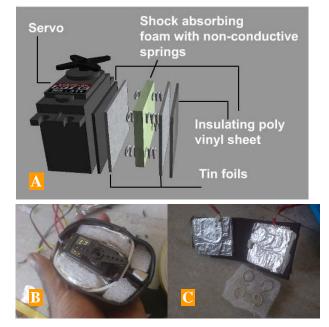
A)Exploded view of the capacitance skin sensor B)Constructed Snake module C)Tin foils with foam and non-conducting springs.
